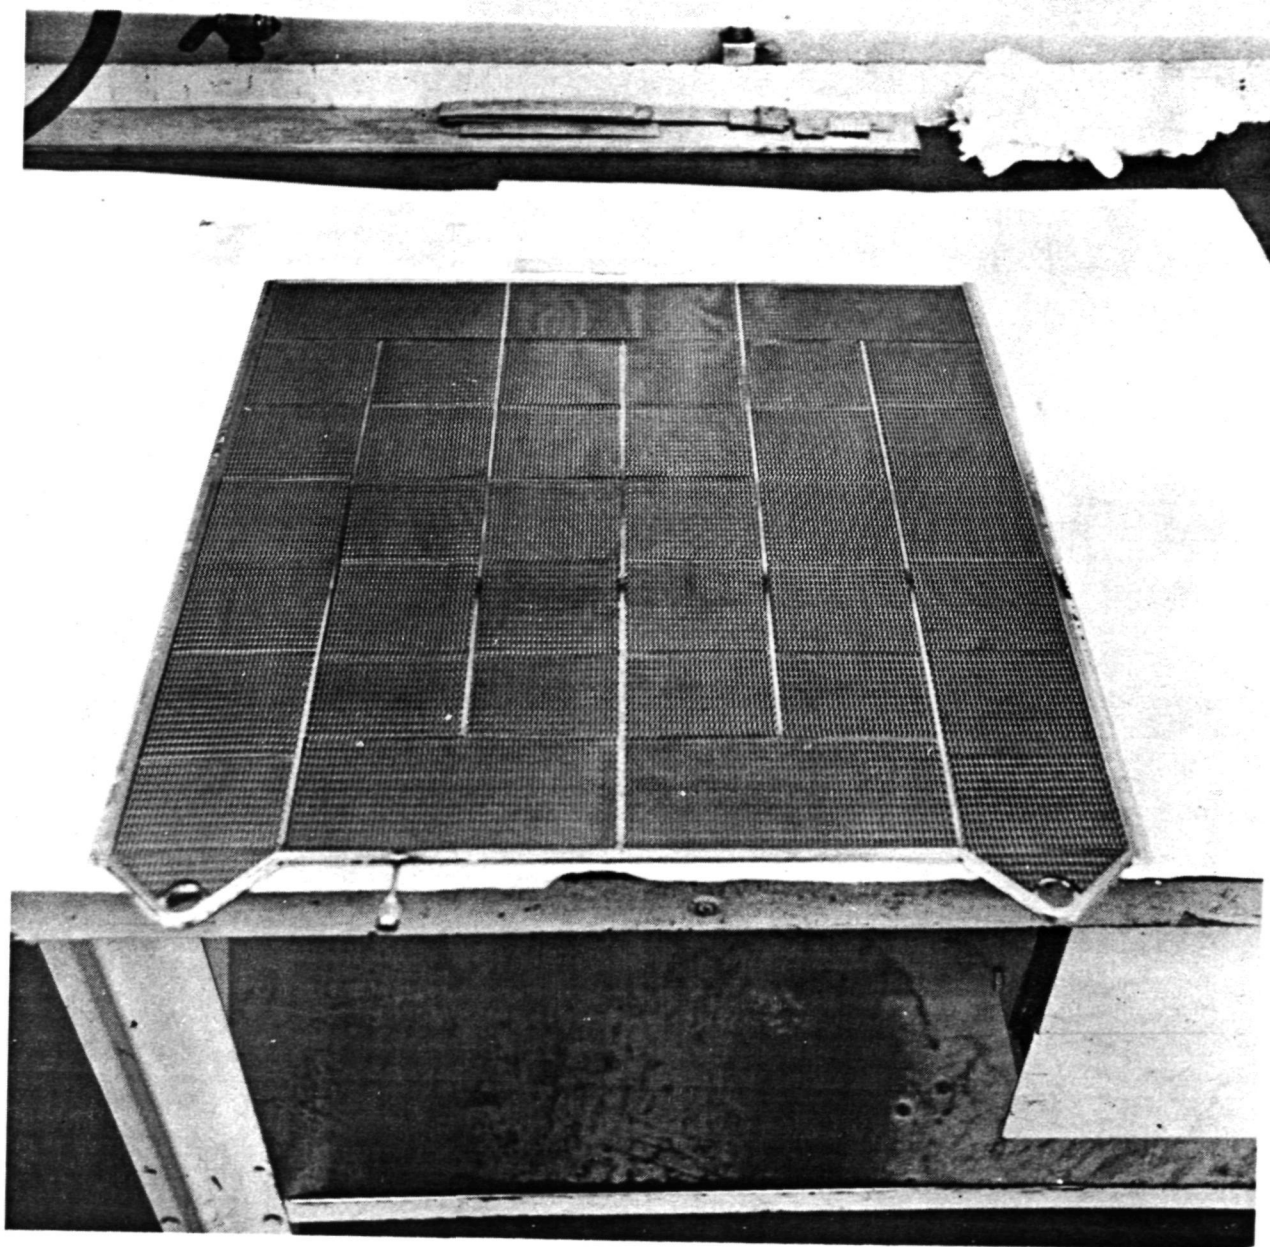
Pressure Bag/Test Panel Assembly for Atmosphere Furnace Brazing.
